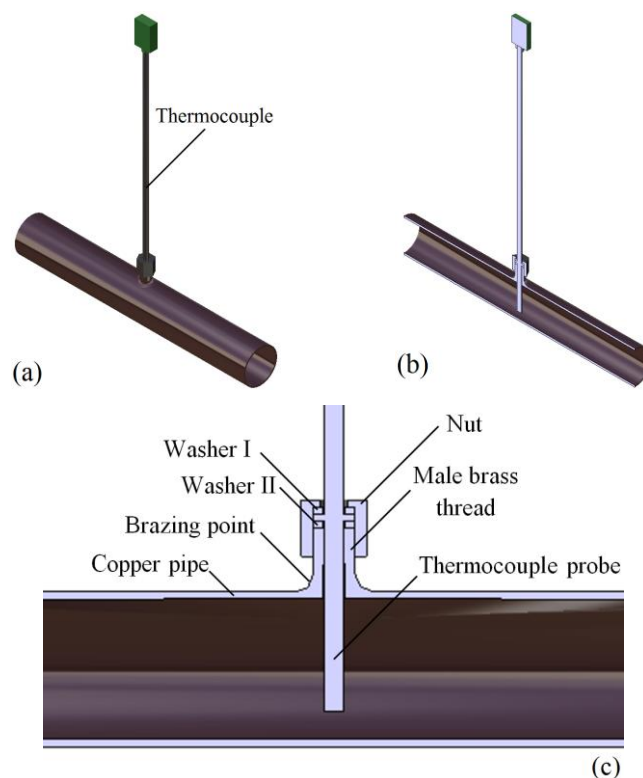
(a) 3D CAD model; (b) Cross-section of 3D CAD model; and (c) detailed 2D cross-section view of thermocouple assembly.
